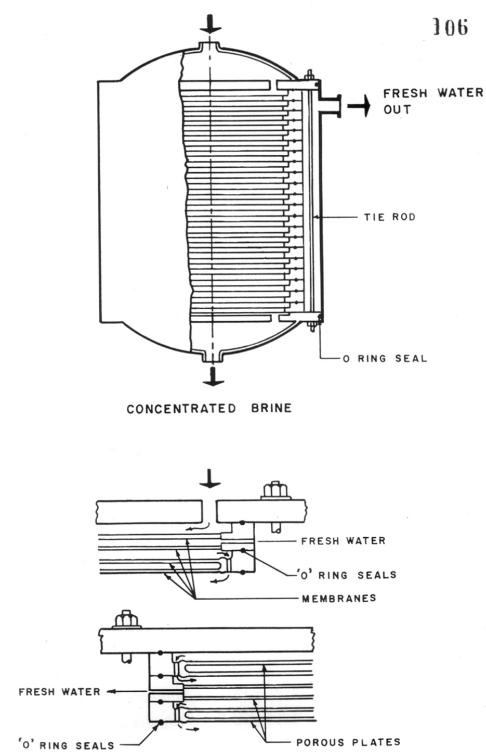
PLATE-AND-FRAME MODULE DESIGN.
